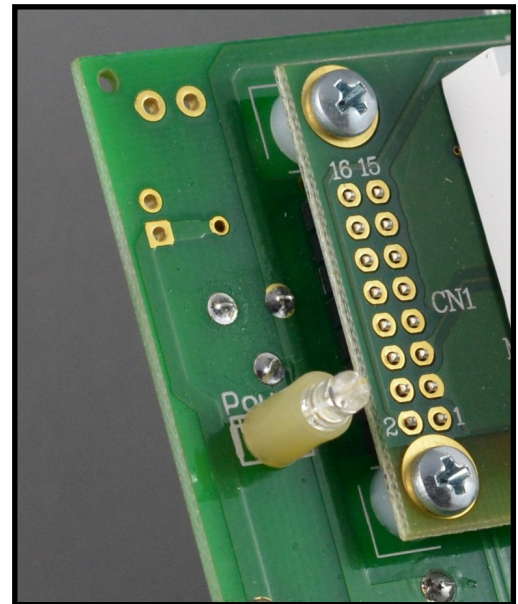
LCD screwed onto the PCB neatly fitted on the header.
